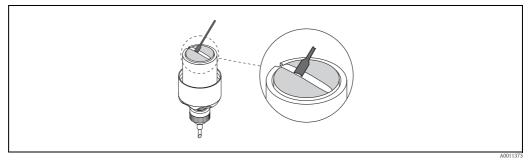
Coating the contact surfaces of the sensor with coupling fluid
